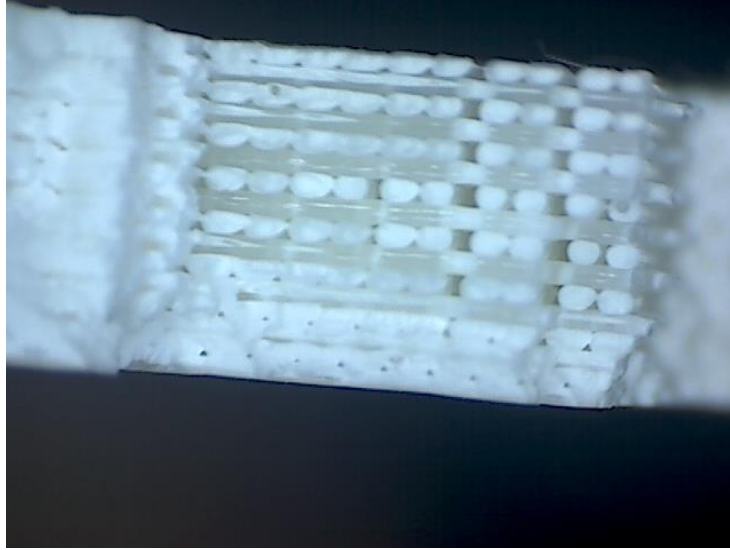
Fracture surface of a +/- 45° toolpath orientation discontinuous build ABS tensile specimen.
